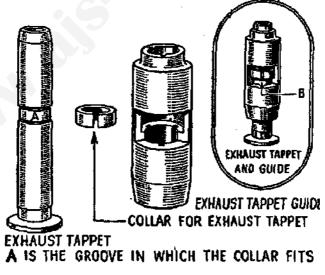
SHOWING POSITION OF SLOT IN TAPPET VALVE.
